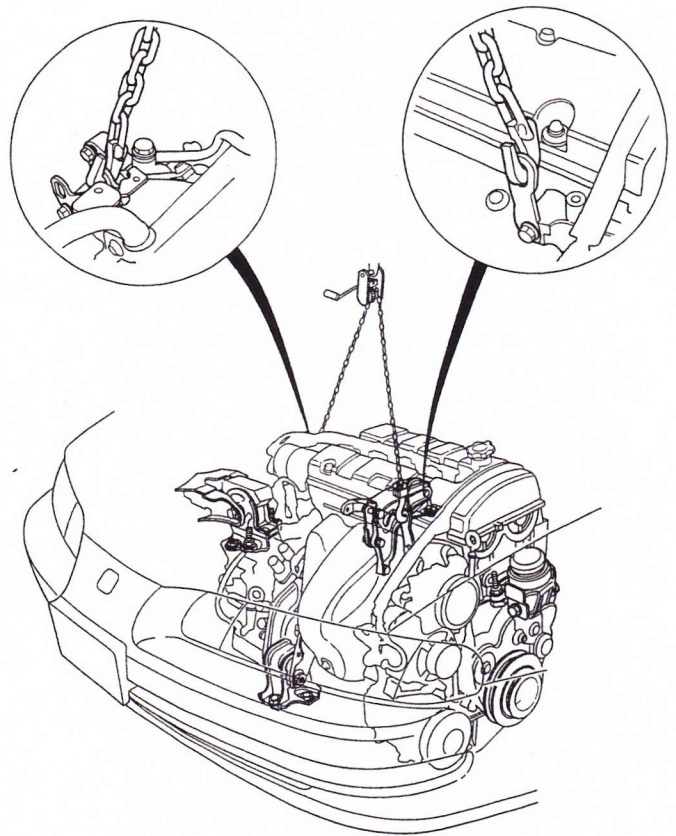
Using a chain hoist to lift an engine. *Courtesy of American Honda Motor Company, Inc.
